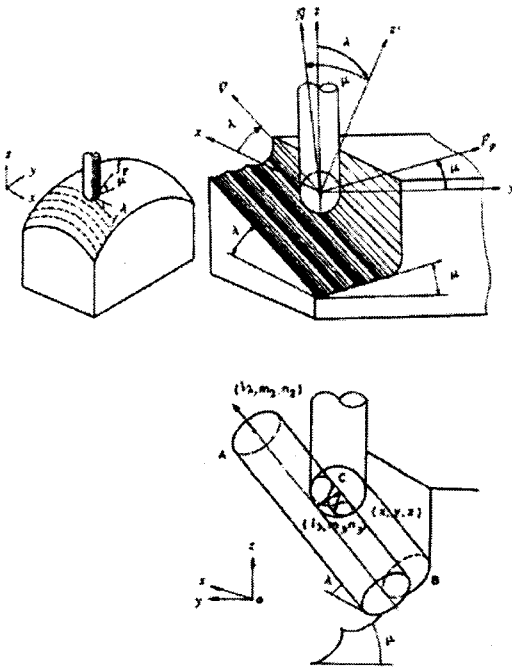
Cutting parameters used to machine sculptured surfaces.
